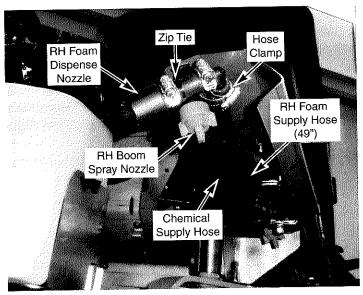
Install Foam Dispense Nozzle and Hose Assembly (RH Shown)
